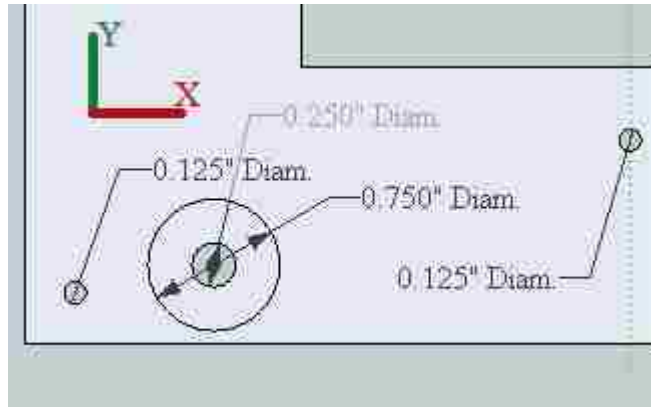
Top view of the 10x10 cm² lower trimmer aluminum plate illustrating hole dimensions.
